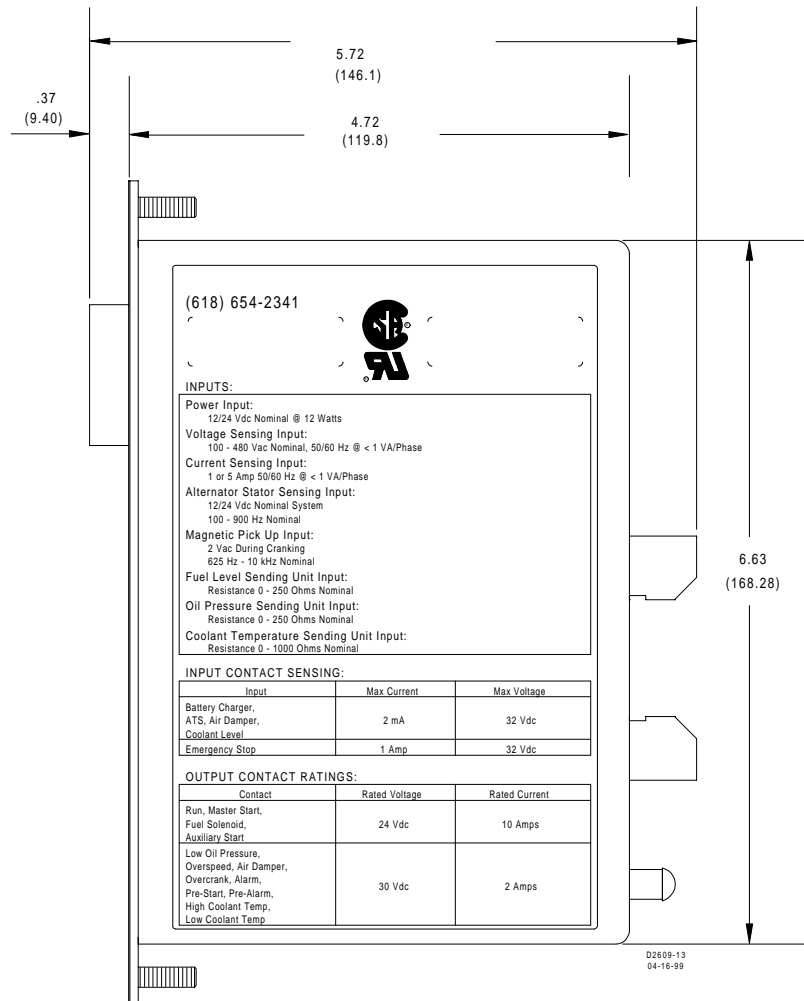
DGC-2000 Overall Dimensions In Inches (Millimeters)
